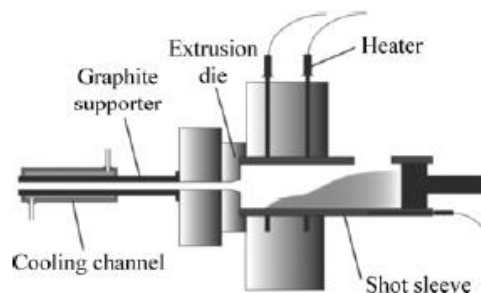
Schematic drawing of rheo-extrusion system [56]
